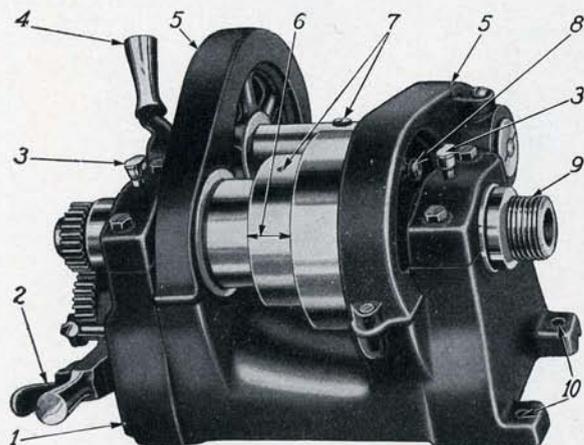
Improved Back-Geared Headstock on New Model 9-inch Junior Lathes
